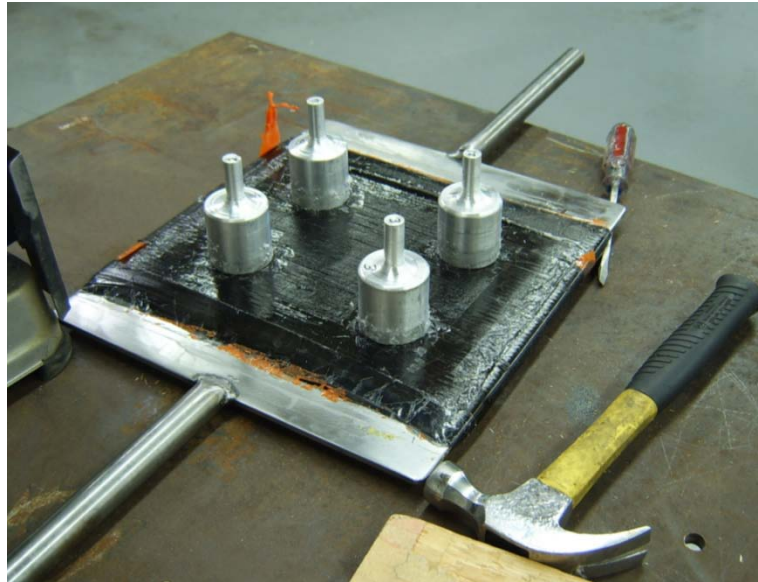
Laminated plate with the aluminum test pieces ready to be removed from the mandrel.
